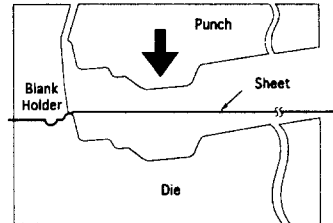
Sectional view of tooling of an inner hood panel with a circular-stepped drawbead
